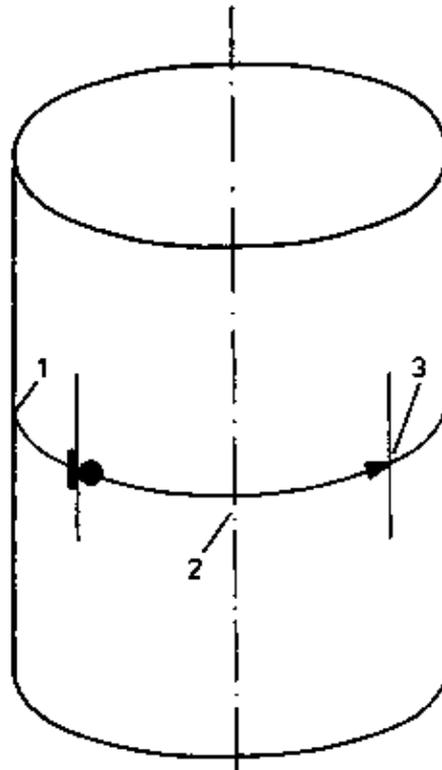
Welding sequence for the gravity position 1 – Tack No. 3
